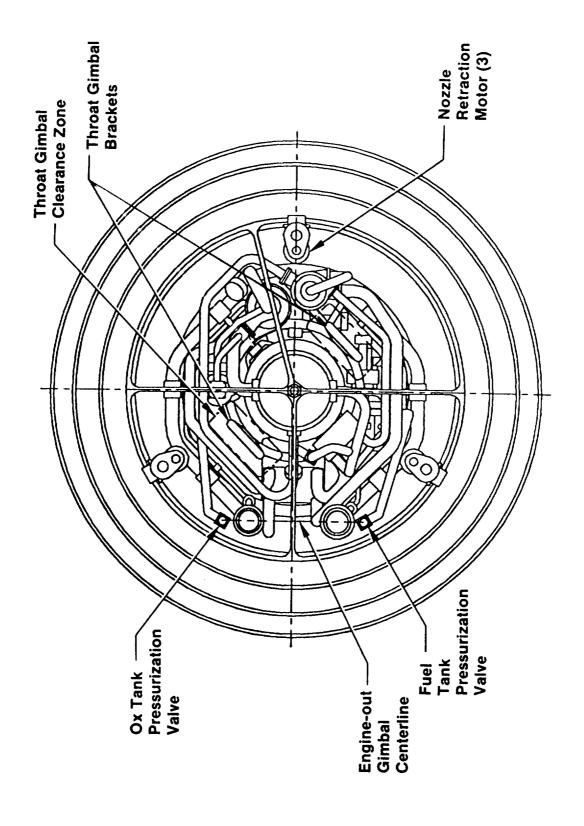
Engine Component and Gimbal Location Top View
